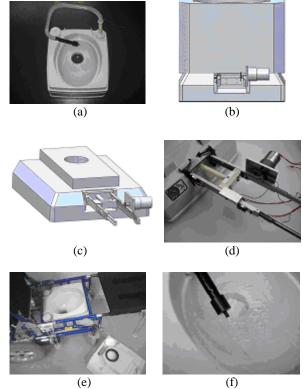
Portable Toilet Equipped With a Water Valve and Exhaust Control Valve
